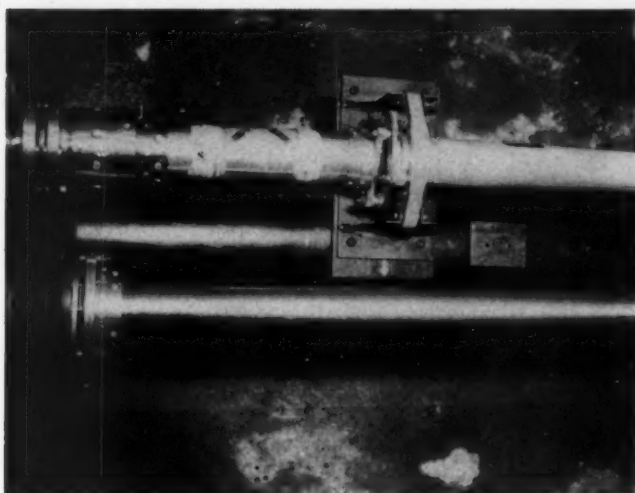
Above—Test stand for shafts and couplings, with locked-in torque
